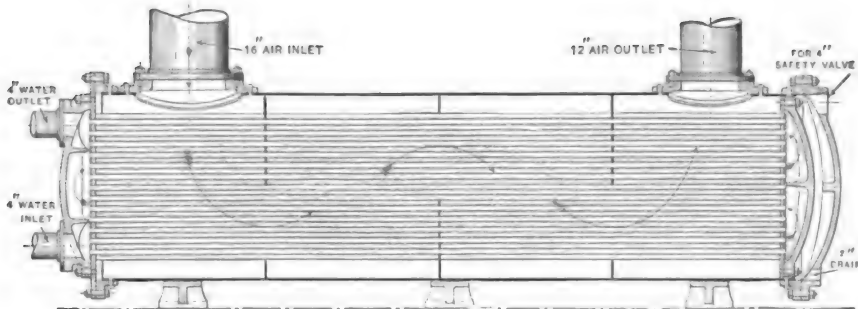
Horizontal Intercooler. Ingersoll-Rand Co.
